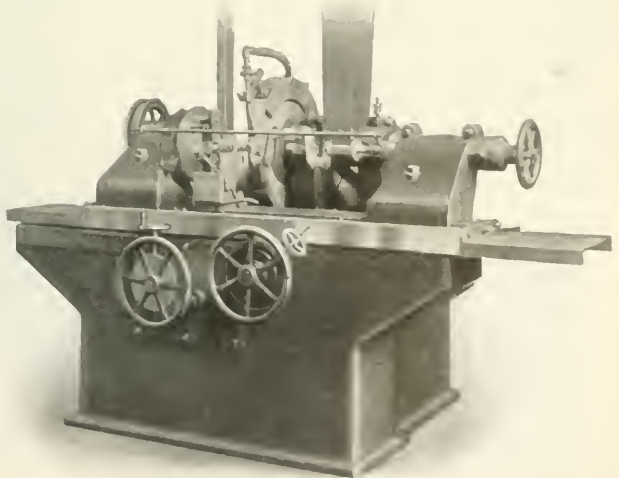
Front View of "Sterling" Grinder built by Young, Corley & Dolan, Inc.
